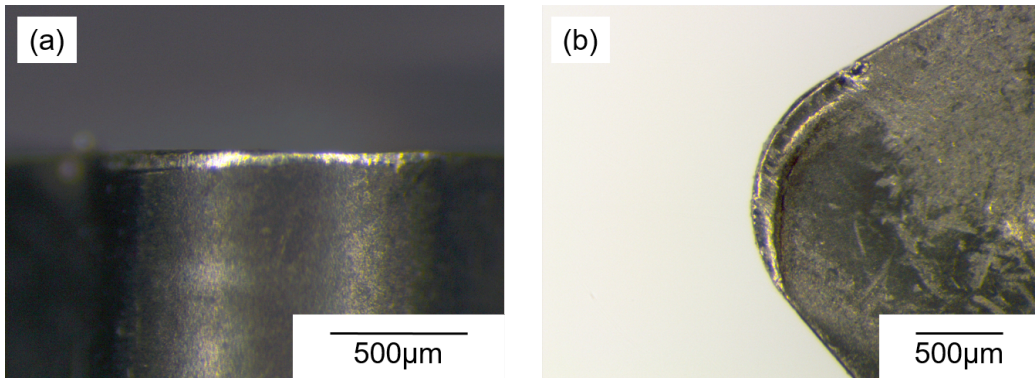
Microscope images showing the degree of tool wear after trial 2.2.2 on billet 3.2. Showing (a) the flank face and (b) the rake face.
